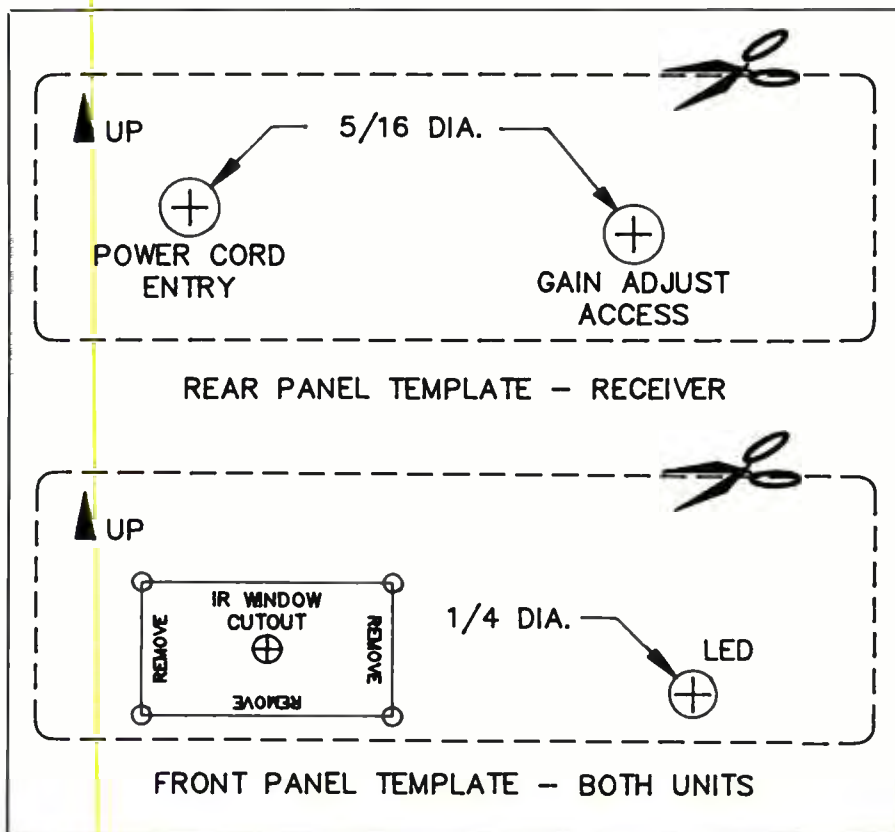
Machining templates for rear (A) and front (B) panels of receiver enclosure.
